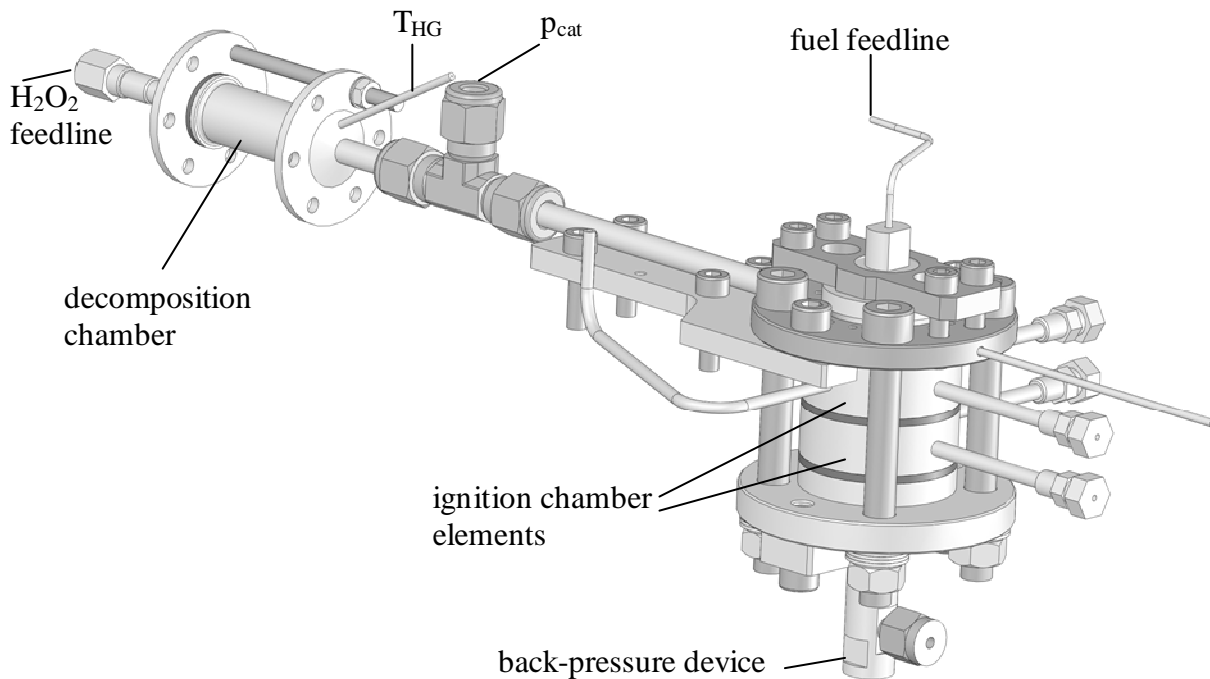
CAD drawing of ignition chamber assembly with decomposition chamber
